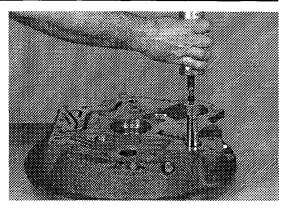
Using a hammer puller as shown, remove oil distributor sleeve (1st and 2nd).
